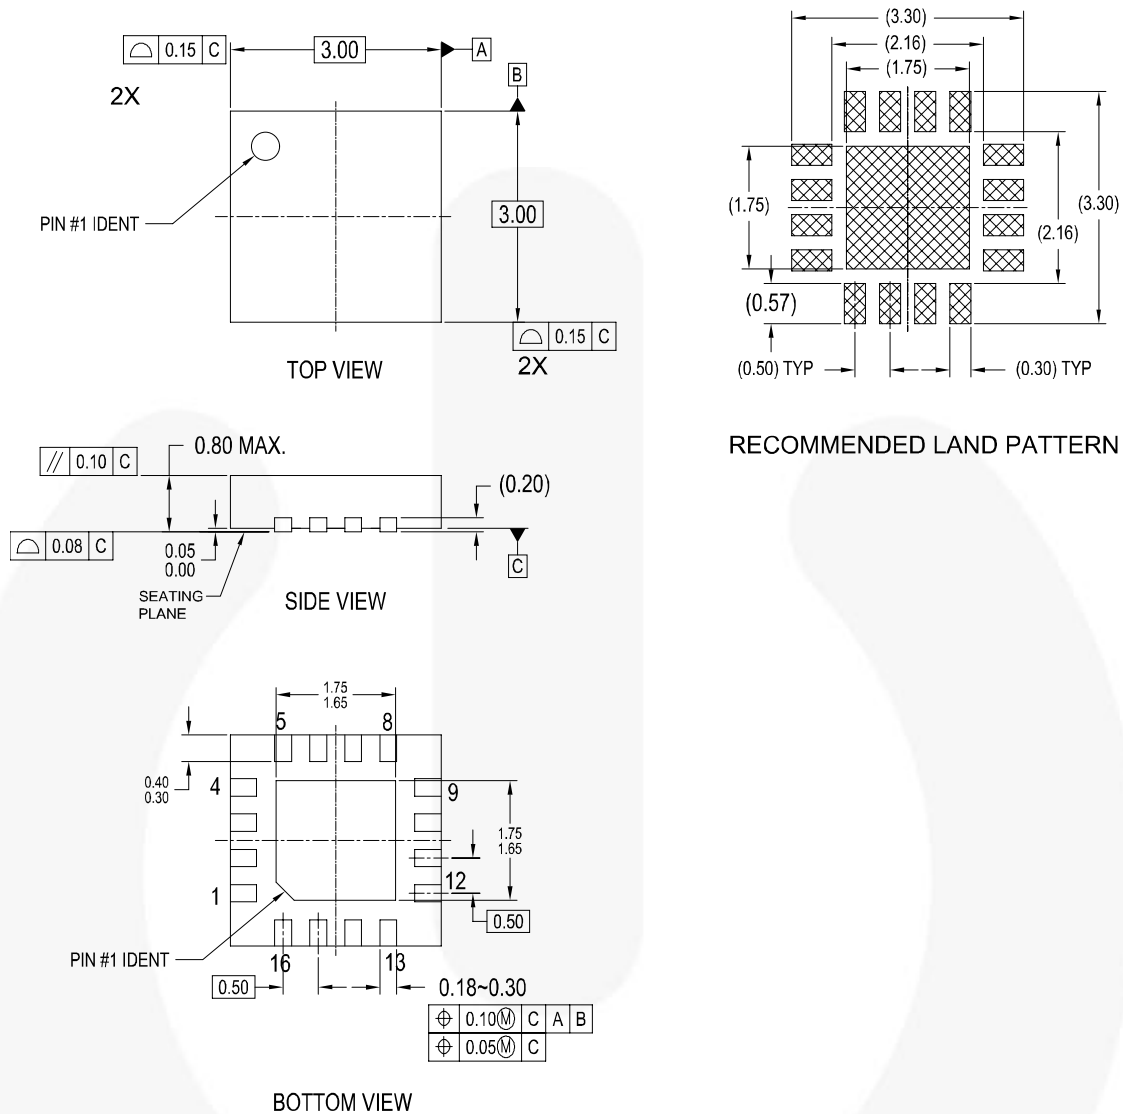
16-Lead Ultrathin Molded Leadless Package (UMLP)
